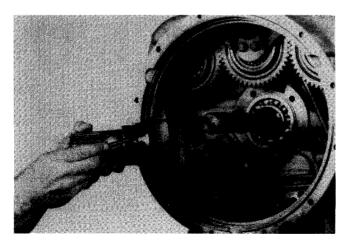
Remove stator support. NOTE: Support must be turned to clear pump drive gear.
